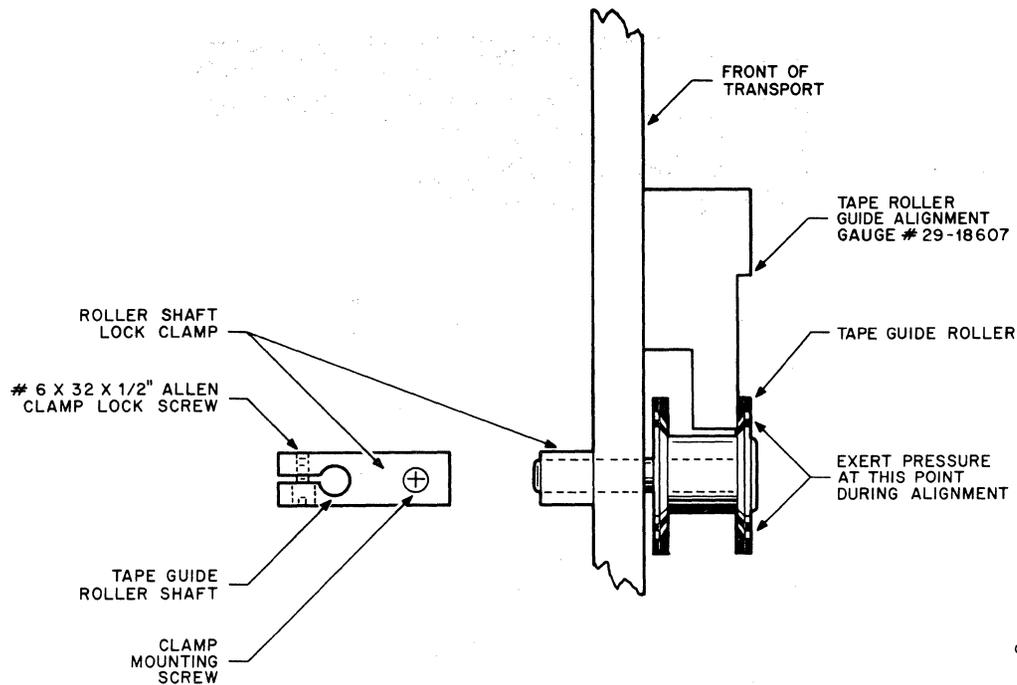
Roller Guide Adjustments, Side View of Roller Guide Tool Insertion
